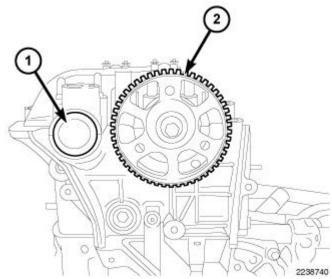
Camshaft Sprocket Courtesy of CHRYSLER LLC
